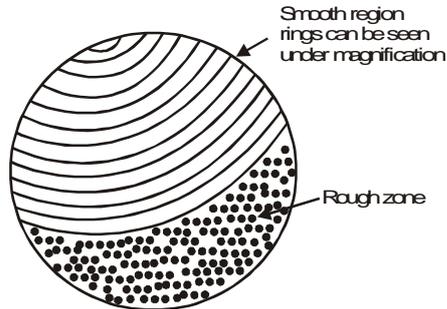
Characteristic Fatigue Fracture
